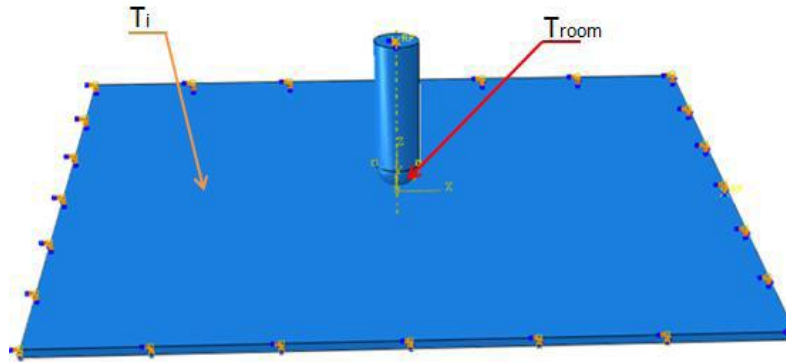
10 Three-dimensional exploded view of numerical model used in SPIF
